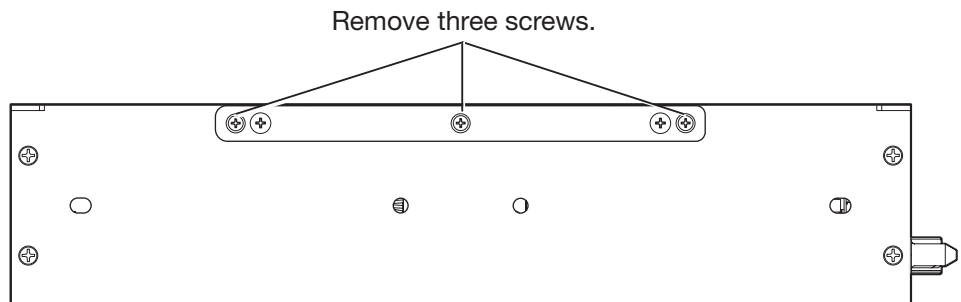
Removing the Metal Strip from the Failed Power Supply Back Panel
